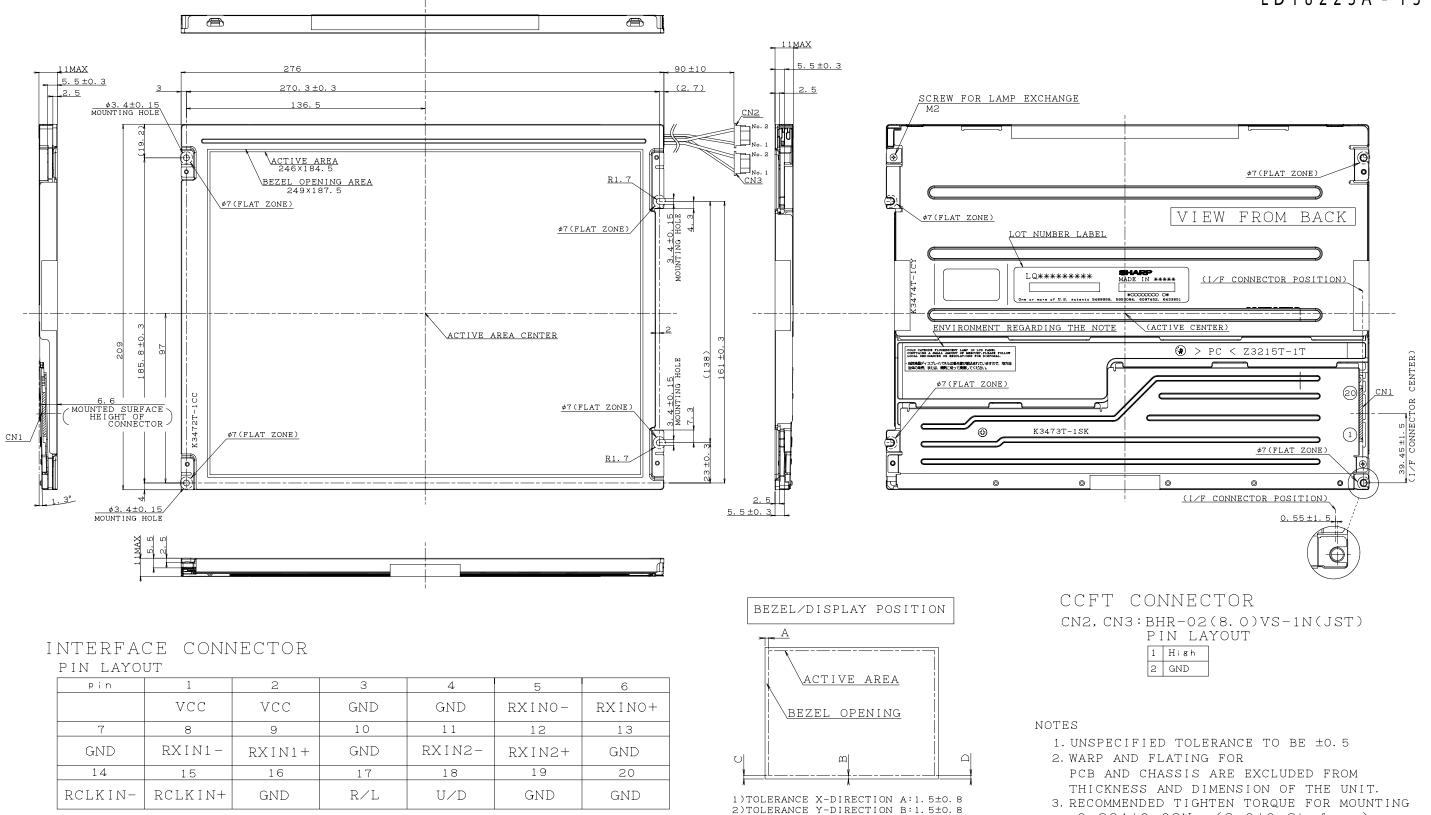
OUTLINE DIMENSIONS (LQ121SILW01)
